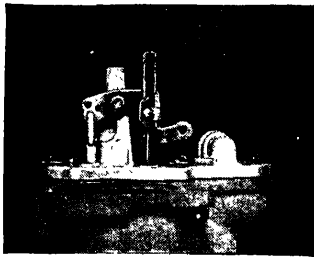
Install metering rod gauge. Pin in pump arm should rest on shoulder of notch in gauge. See Carter Specifications table for correct gauge number
